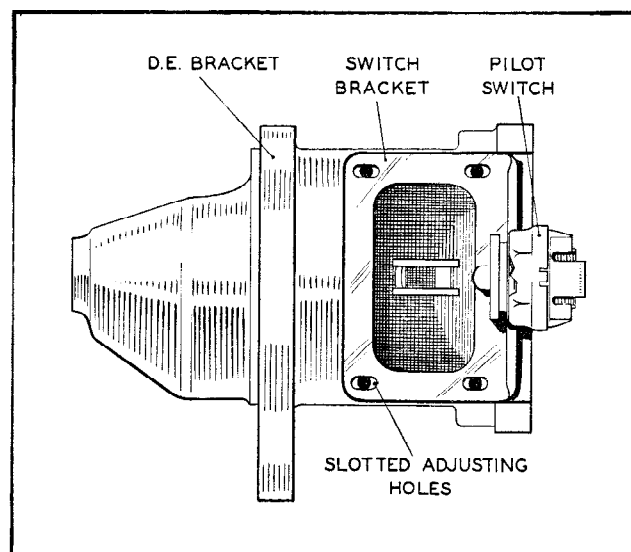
Pilot Switch Bracket with rubber cover removed to show slotted adjusting holes
